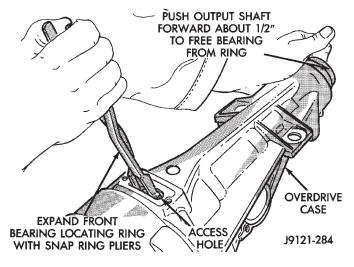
Releasing Shaft Front Bearing From Locating Ring
